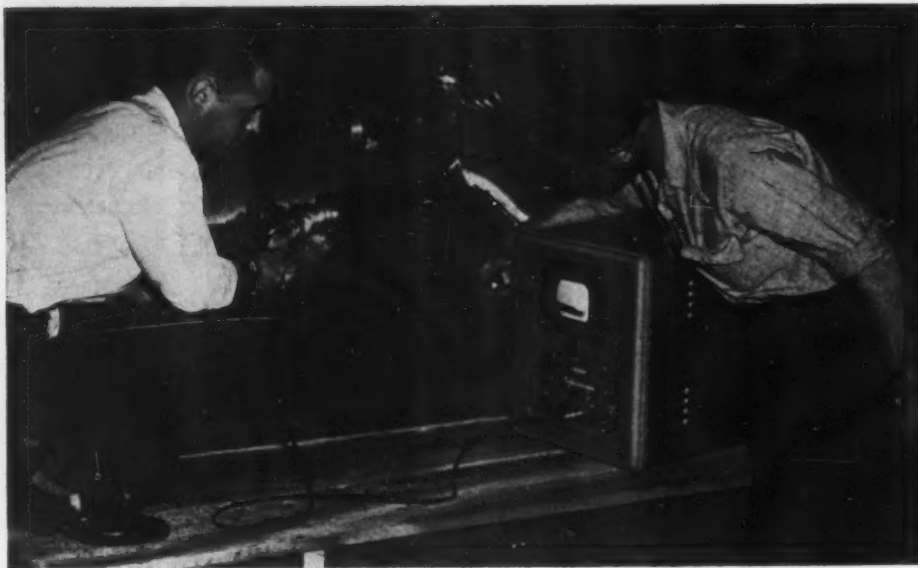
An 8000-lb crankshaft being inspected with a Sperry Reflectoscope prior to final heat treatment. Todd Gardner, author of this paper, is holding the crystal while R. M. Peterson, Laboratory Technician, is inspecting the screen pattern.
